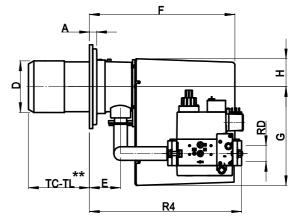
Dimensions GAS X3CE-LX - GAS X4CE-LX
